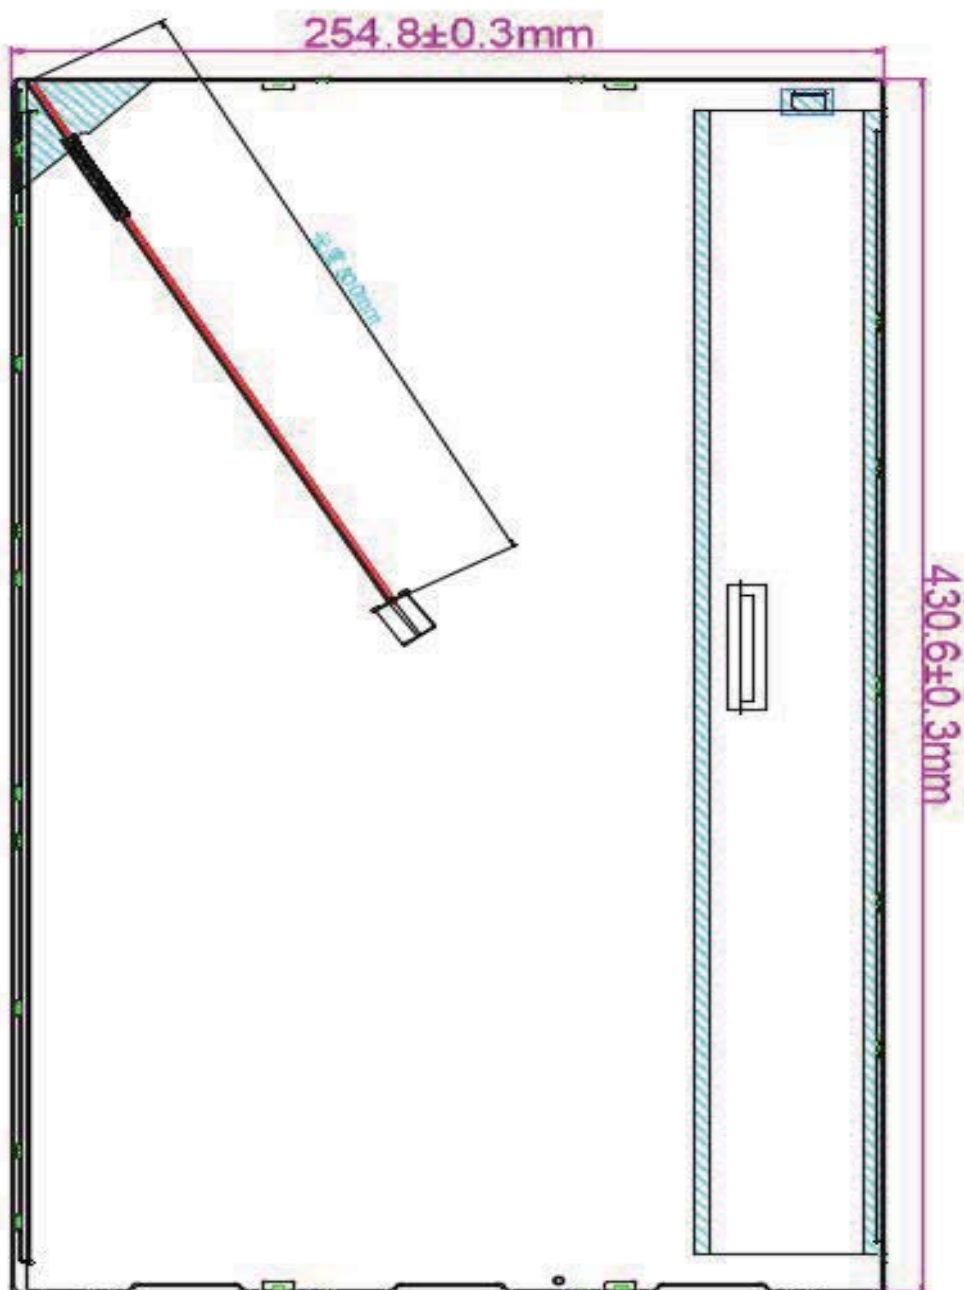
TFT-LCD Module Outline Dimensions (Front view)
